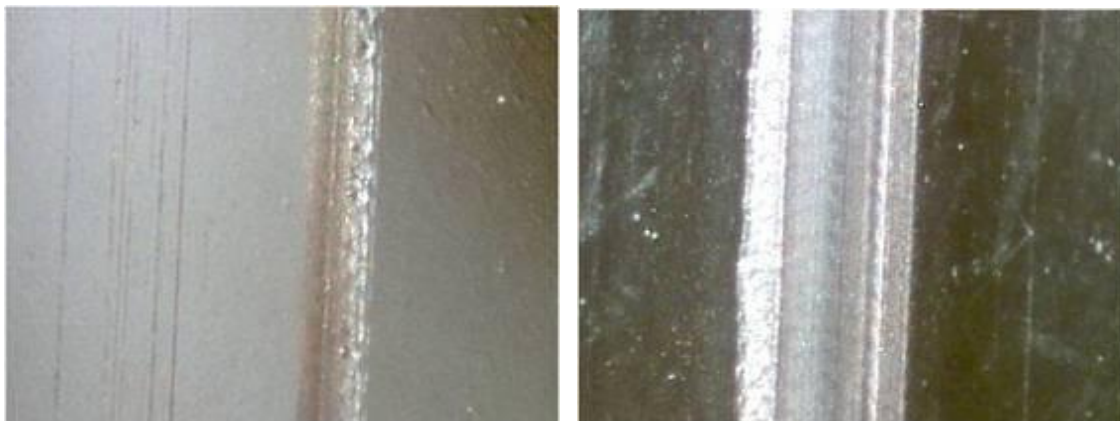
Quality of the weld seams (0.4 mm – left picture, 0.85 mm – right picture); 60 times magnification.
